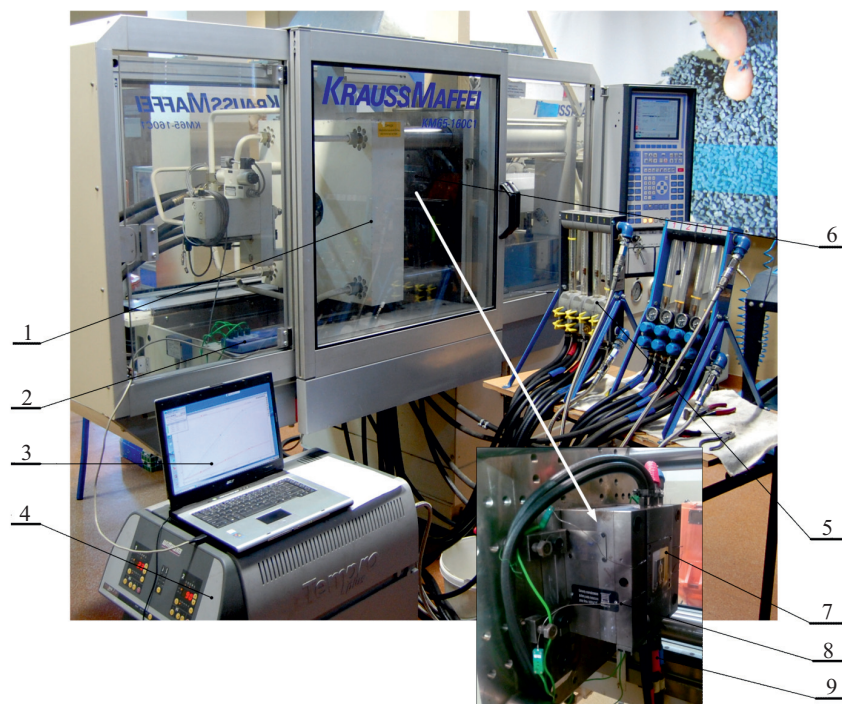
A view of the research stand: 1 – injection molding machine, 2 – temperature recorder, 3 – computer, 4 – temperature controller, 5 – rotameter, 6 – mold, 7 – molding, 8 – thermocouple, 9 – water pipes
